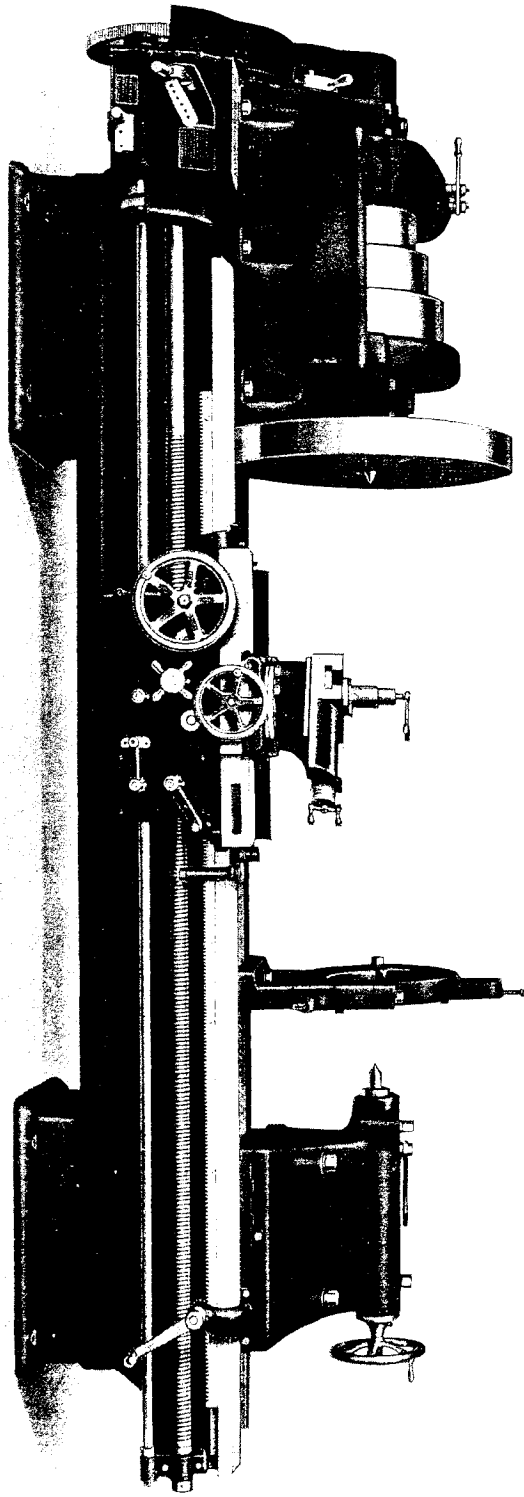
30" x 14' Sidney Heavy Pattern Quick Change Gear Engine Lathe.
